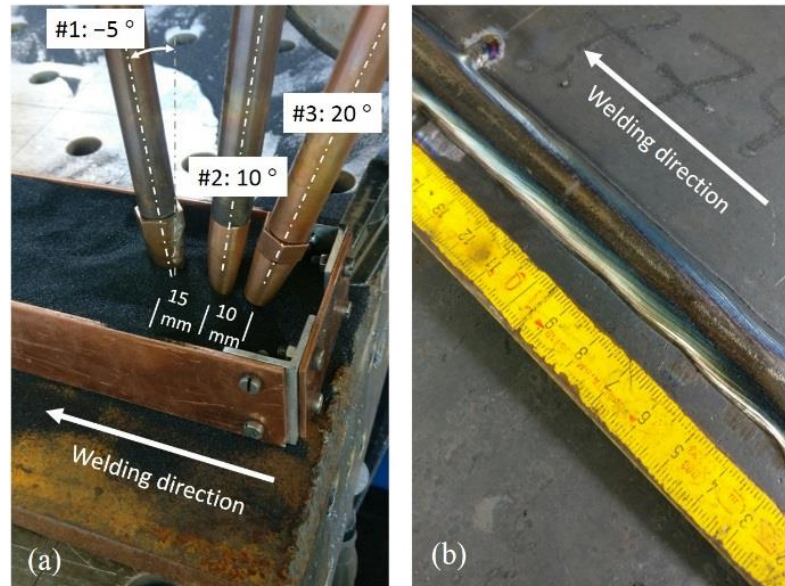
Submerged arc welding of 30 mm plates EH36: (a) welding torch configuration; (b) outer appearance of the three-wire SAW weld.
